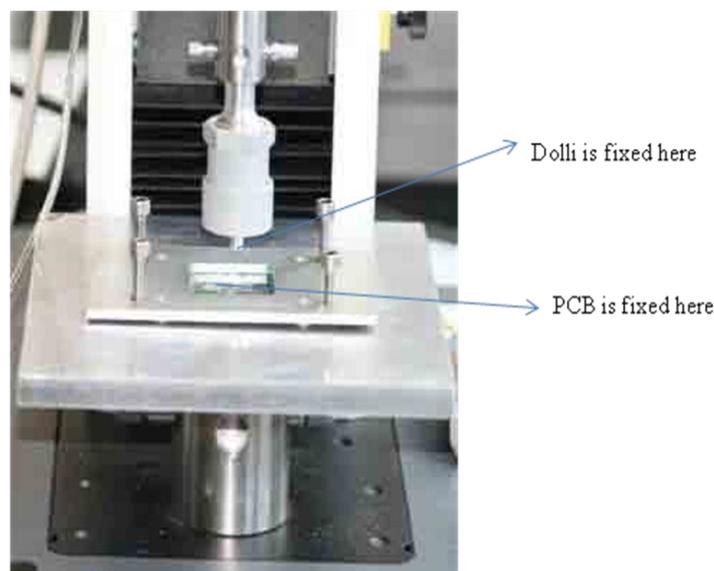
Fixture for measuring the adhesion strength of the conformal coating on Printed Circuit Board Assembly
